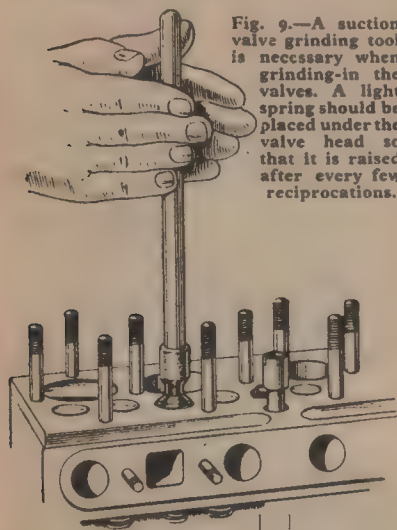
A suction valve grinding tool is necessary when grinding-in the valves. A light spring should be placed under the valve head so that it is raised after every few reciprocations.
